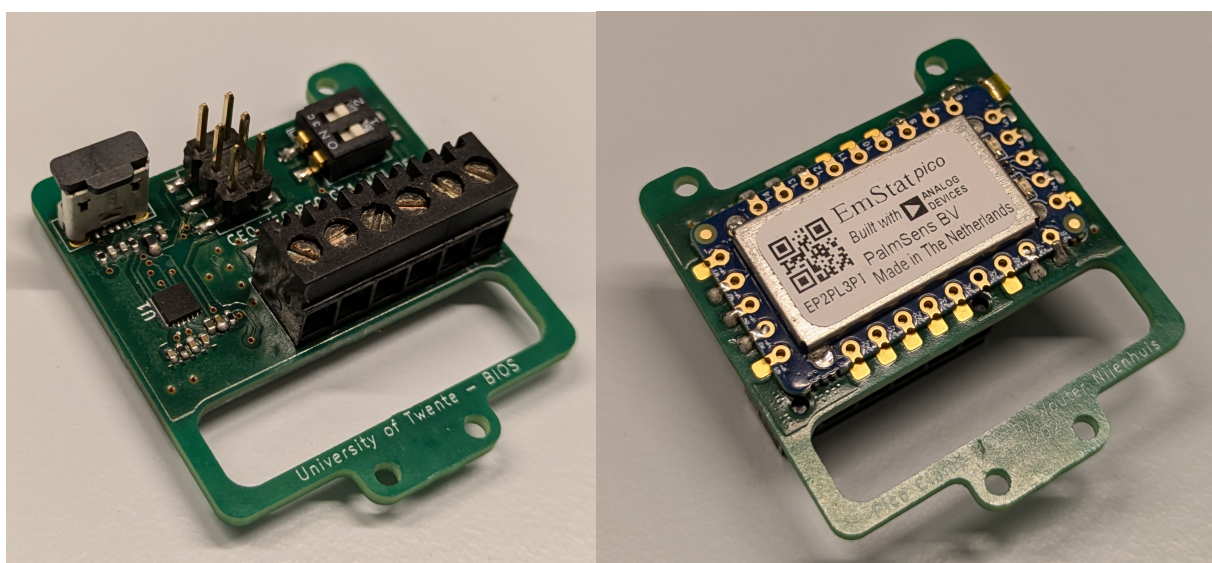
The front and back sides of the produced PCB with all the soldered components.
